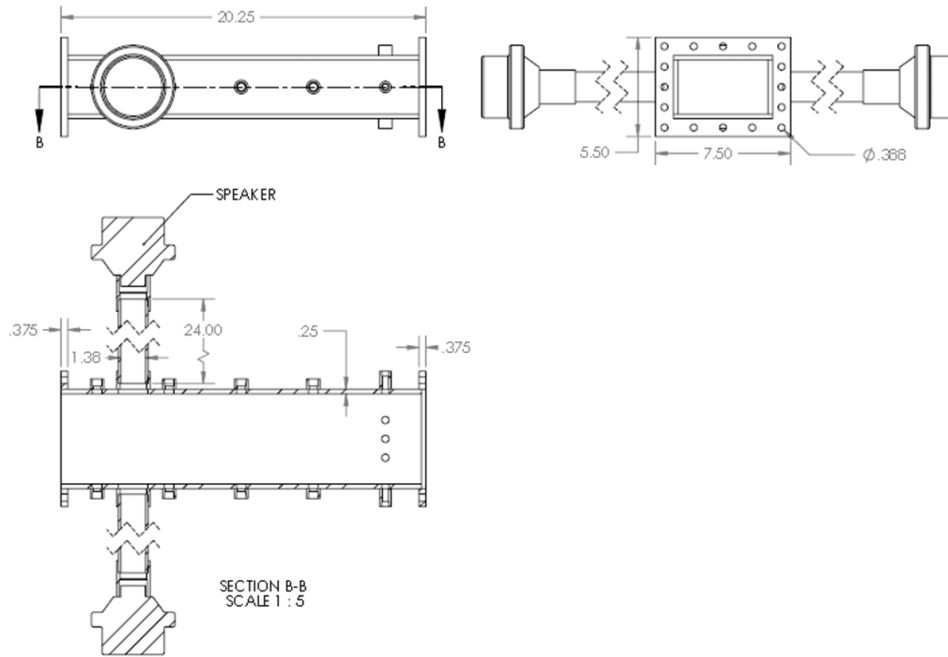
Schematic of the fuel mixing and acoustic forcing section, dimensions in inches
